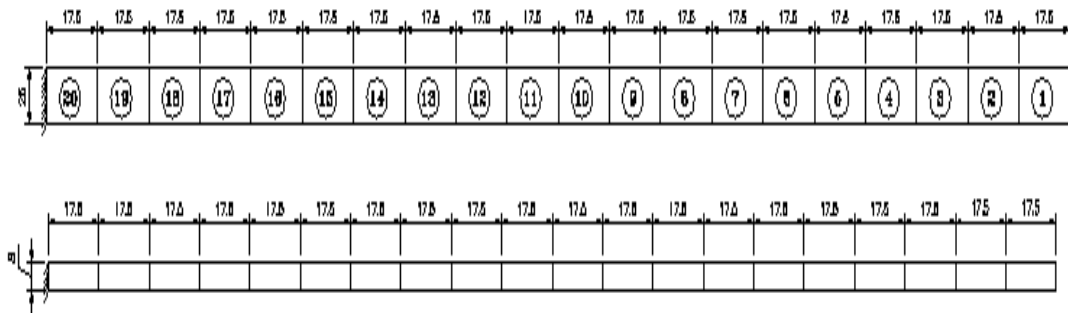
A 350 mm cantilever beam made of Acrylic material
